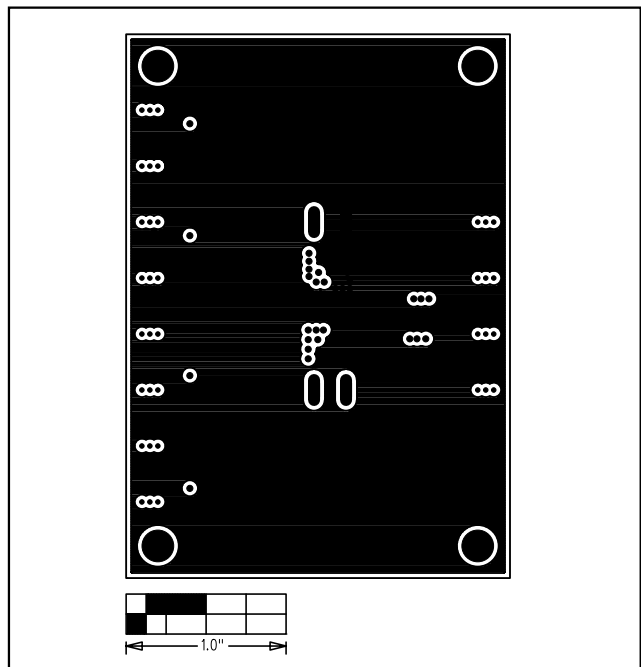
MAX9382 EV Kit PC Board Layout—Inner Layer 3 (VCC Layer)
